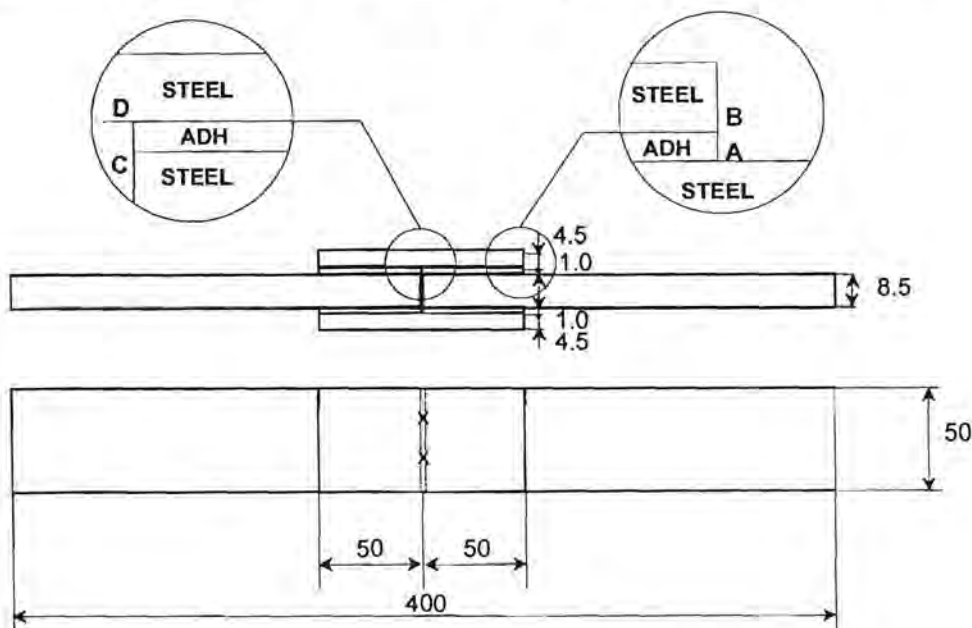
Double-strap steel joint specimen (dimensions in millimeter).
